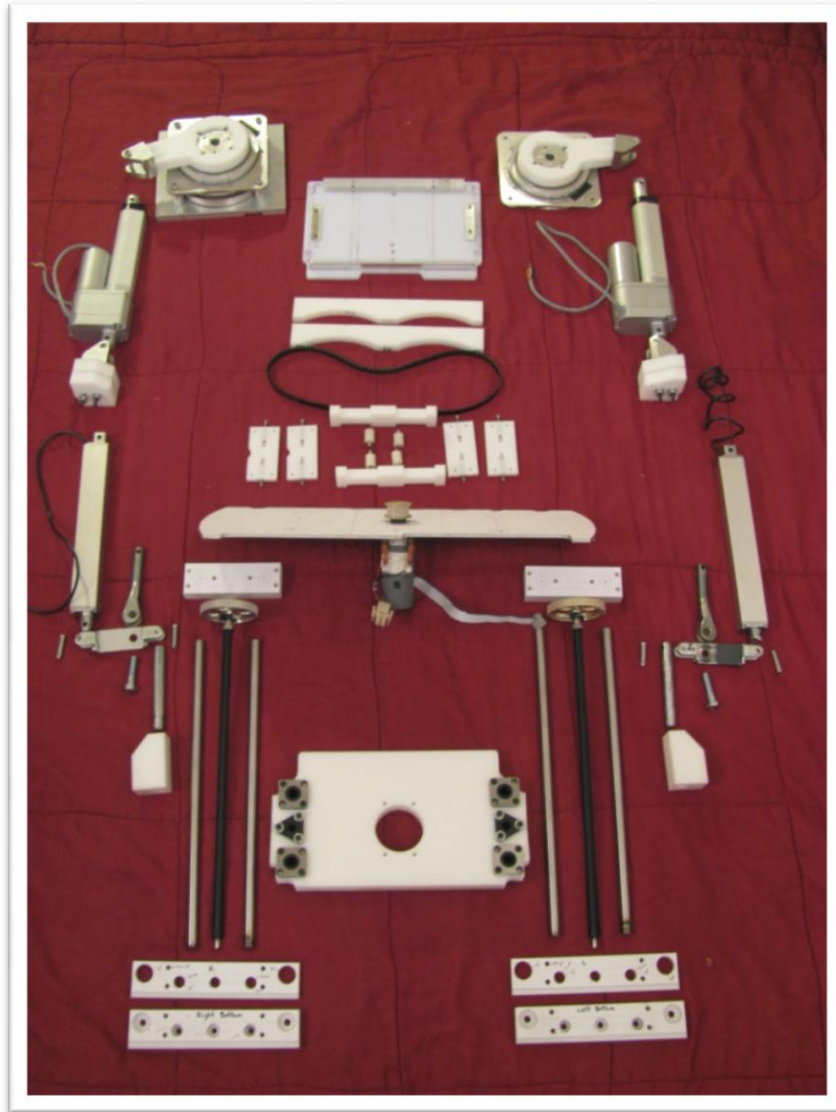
2-3-2 mechanism parts layout - Photo by: Blake Mann
